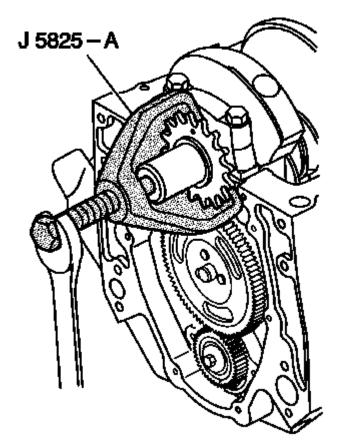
View Of J 5825-A Removing Crankshaft Sprocket Courtesy of GENERAL MOTORS CORP.
